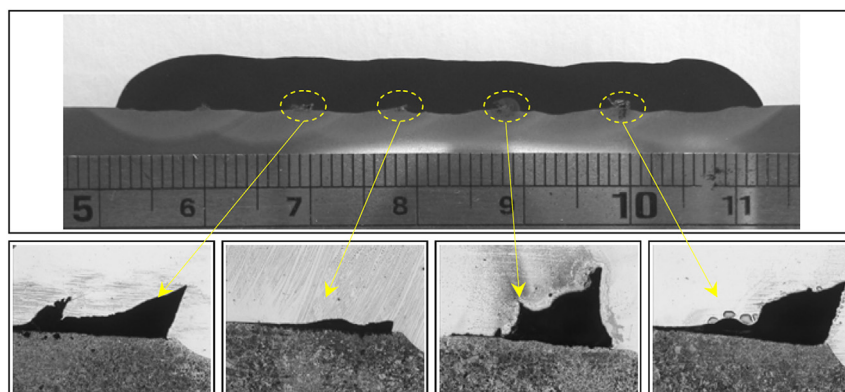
Cross-section of Sample C showing the weld zone macroscopically and some defects along the interface.
